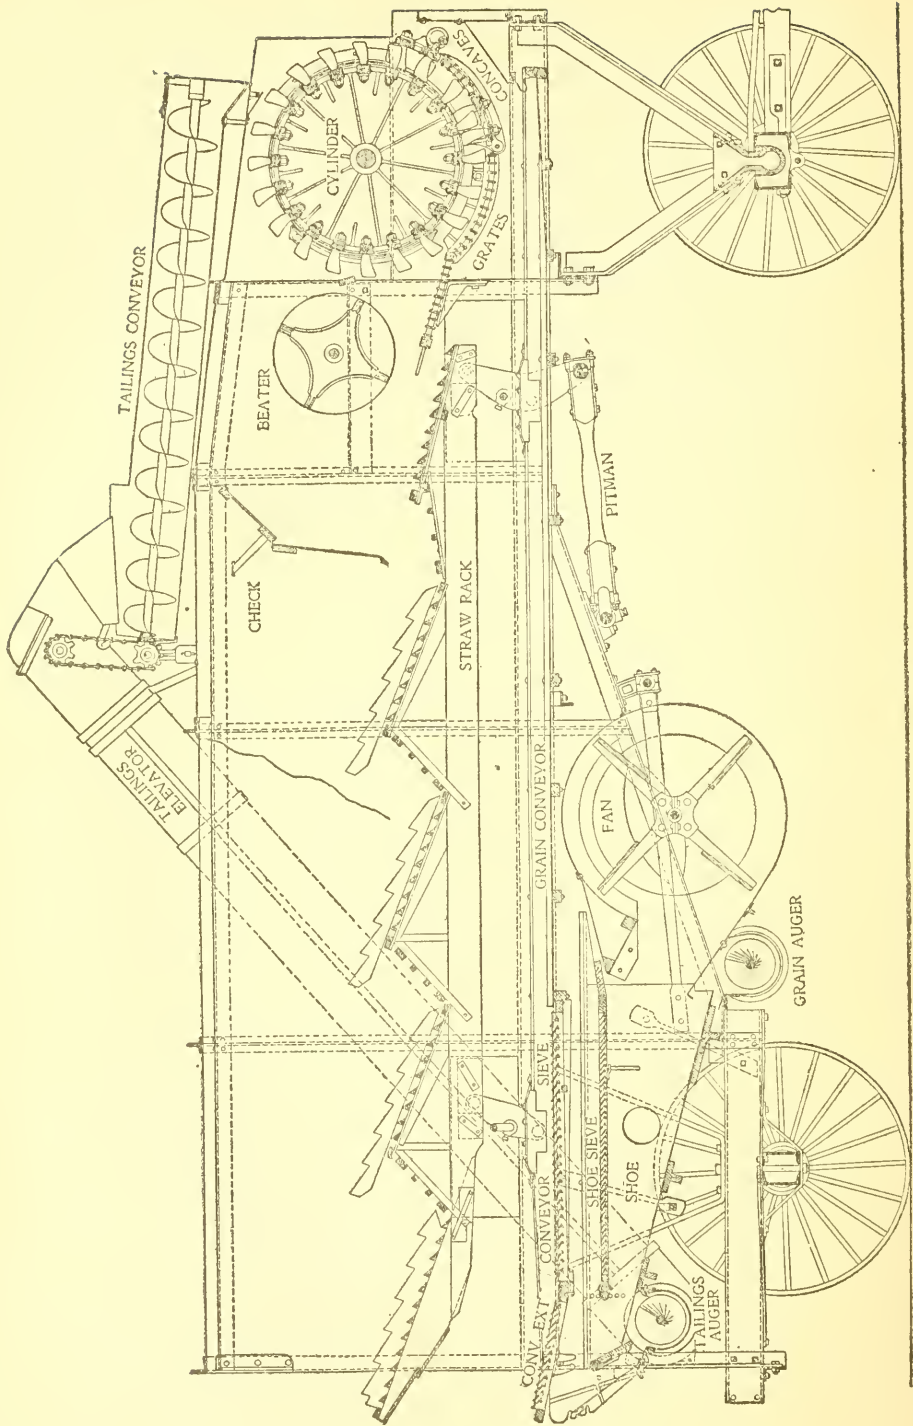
SECTIONAL VIEW OF CASE SEPARATOR.
